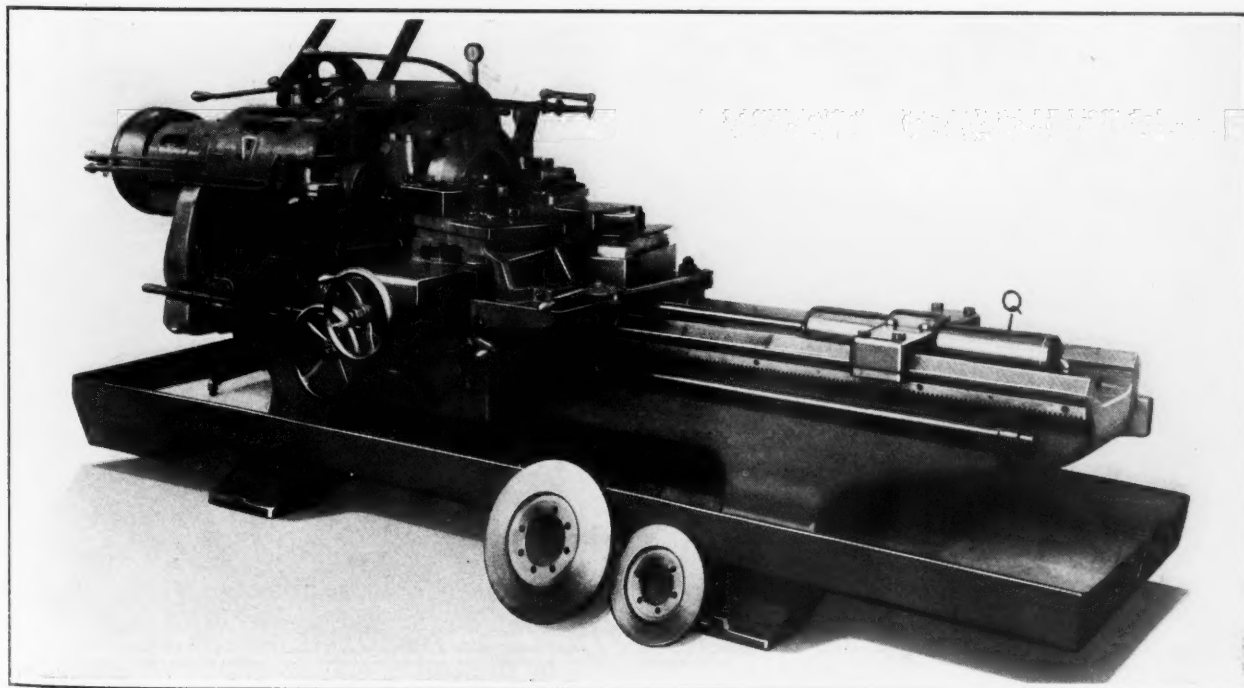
Turret Lathe Equipped with a Flat Table for Second Set-up in Machining Gear Blanks
